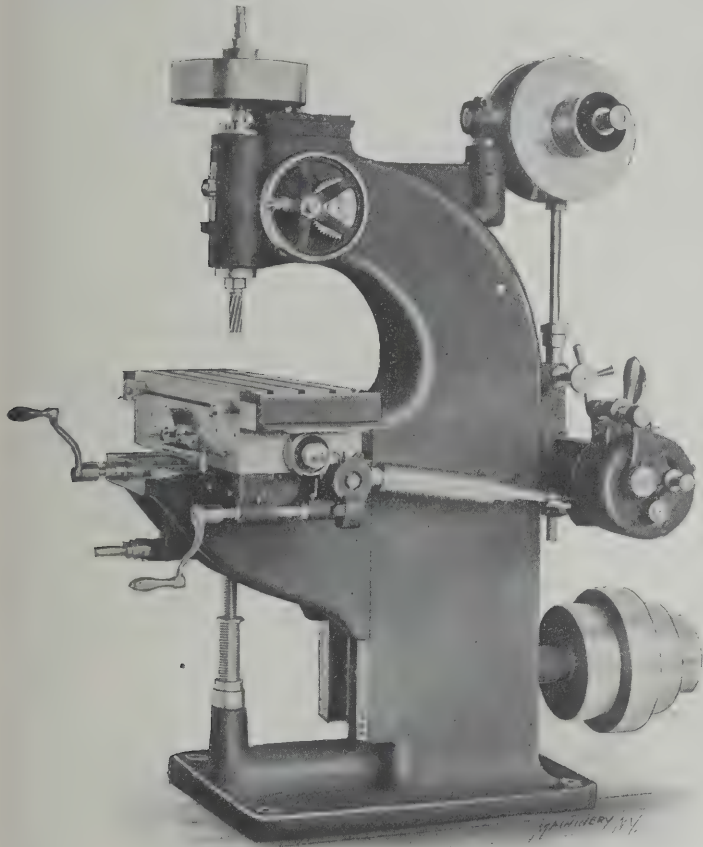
Side View of Friction Feed Vertical Milling Machine, built by Becker Milling Machine Co., Hyde Park, Mass.
